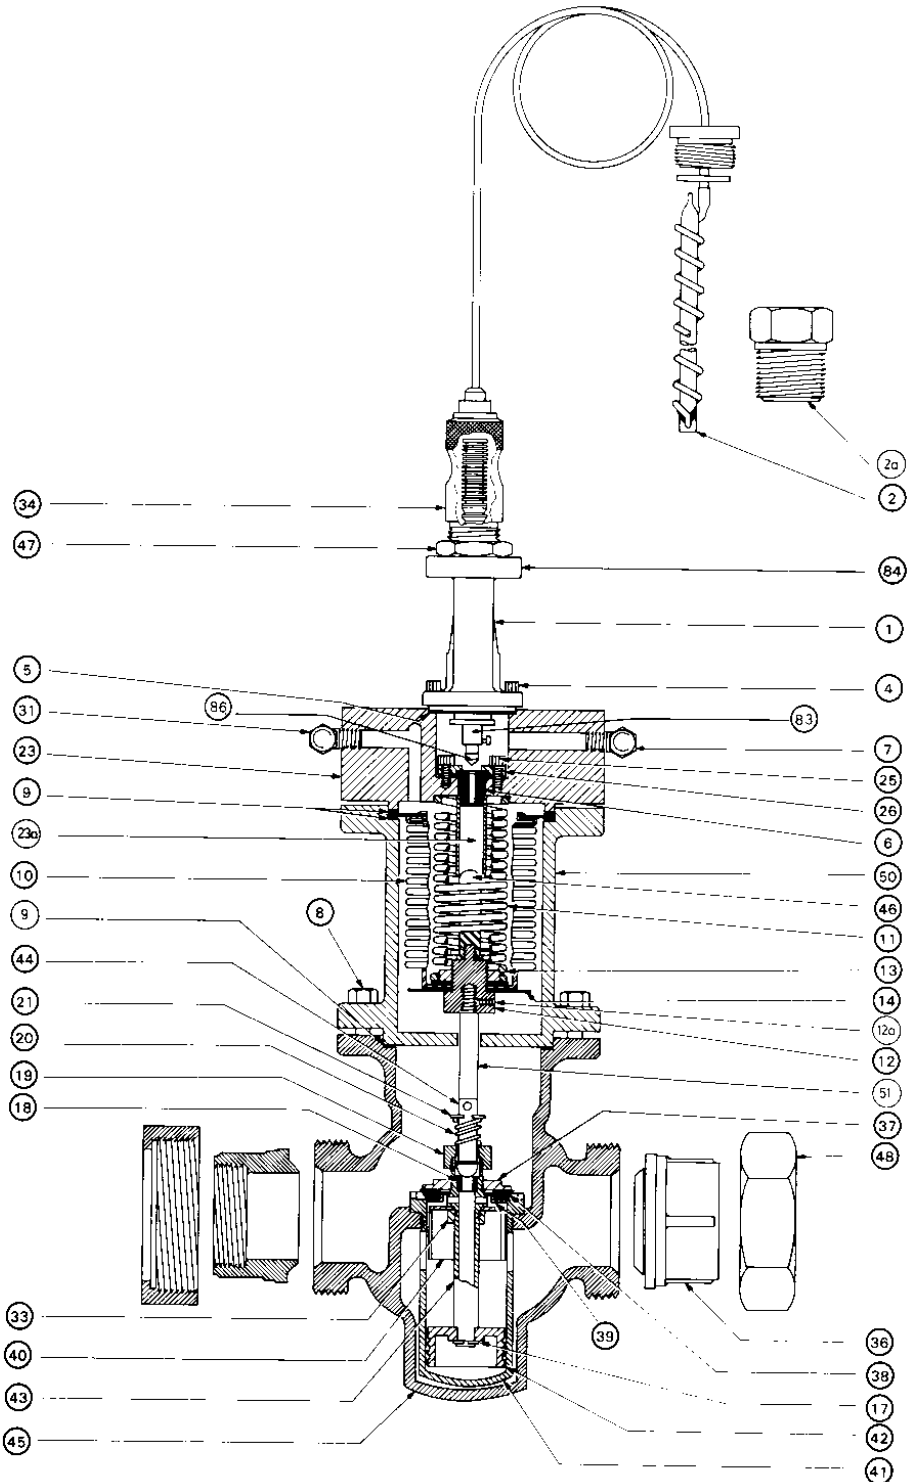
TEMPERATURE REGULATOR, ASSEMBLY DRAWING
